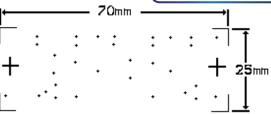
Hole Centre Map marks the centres of all the holes to be drilled in the PCB, from the copper side. (View is from the copper side) Scale 1:1
